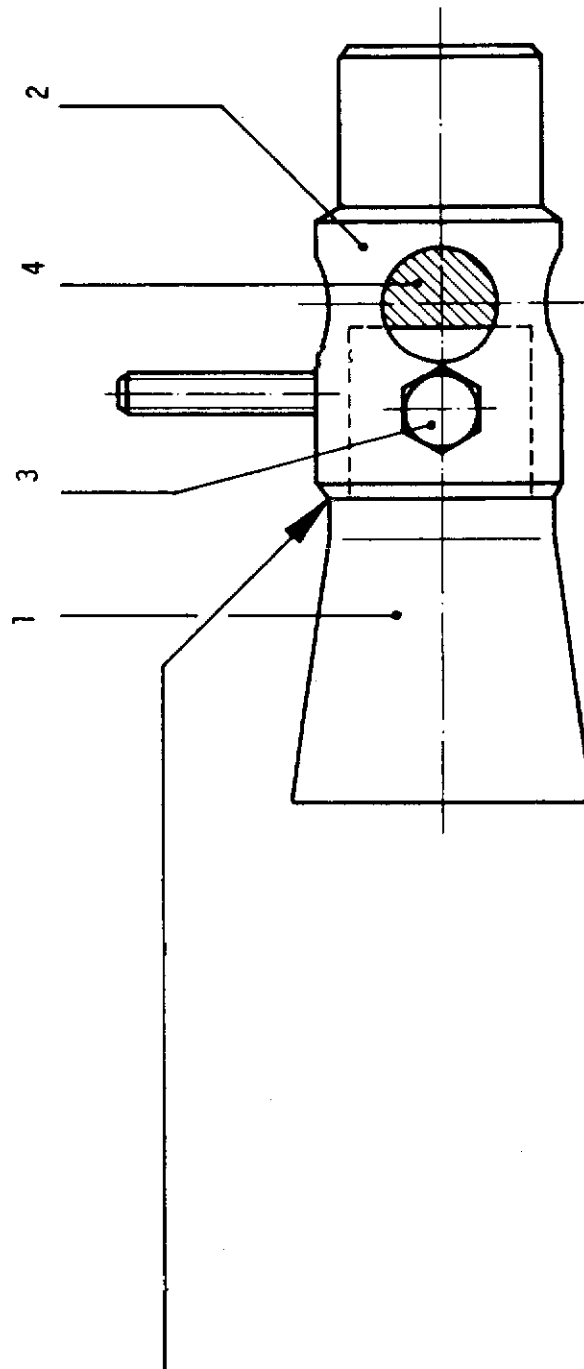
Installation of mixing pipe for usage of Diesel fuel or Fuel oil EL
